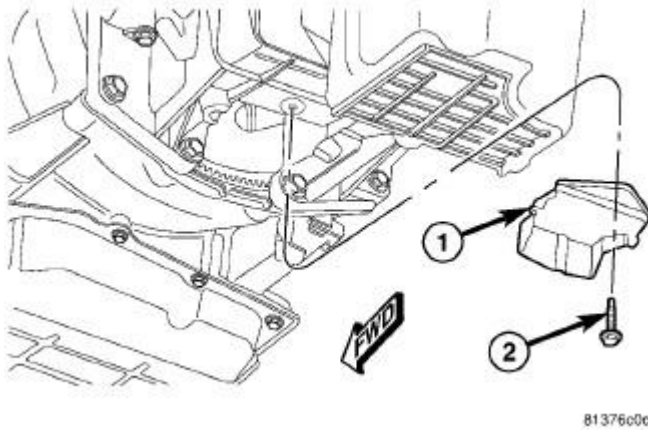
Removing/Installing Torque Converter Access Cover - 3.5L
